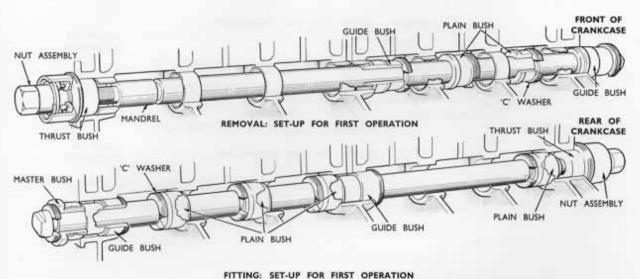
Removing and fitting camshaft bearings — 6-cylinder engine
